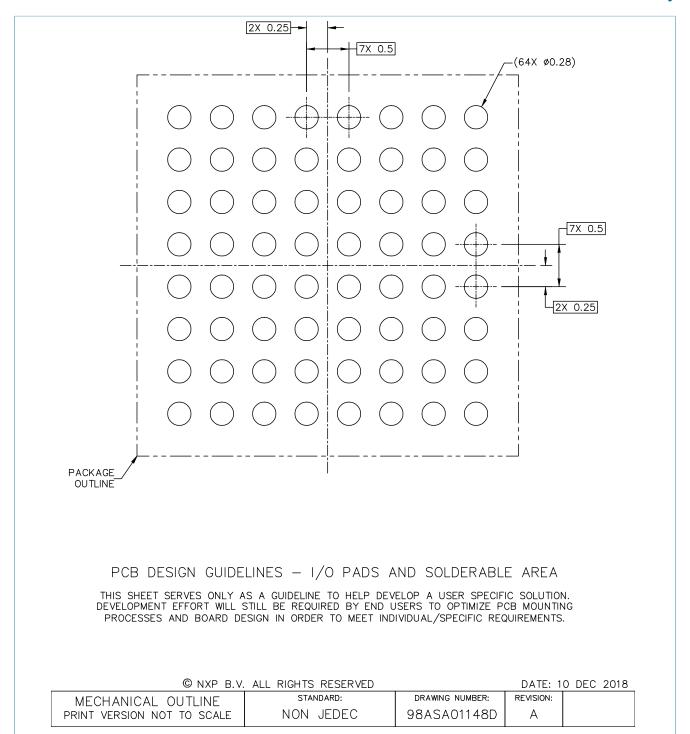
Reflow soldering footprint part2 for VFBGA64 (SOT1307-2)
